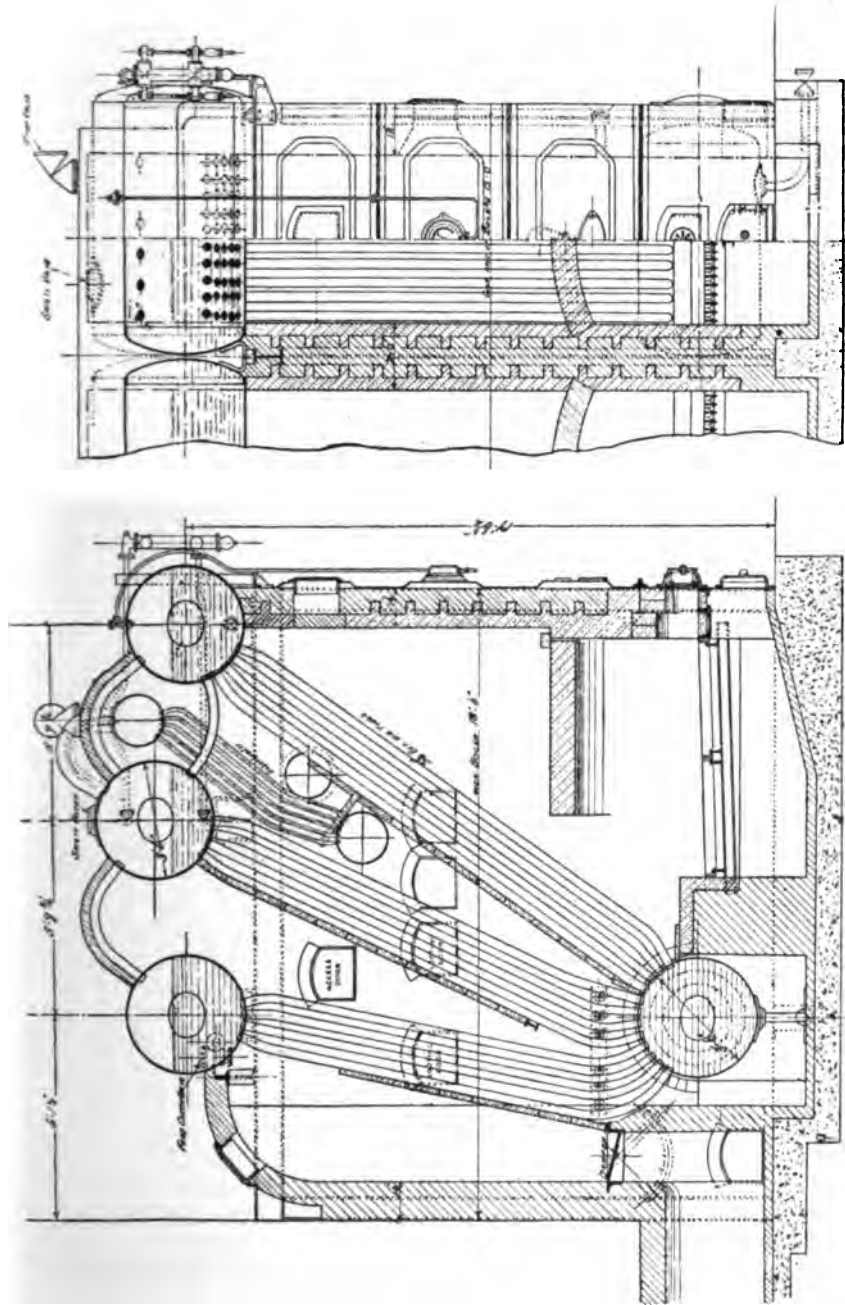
Longitudinal and Transverse Sections, with Part of the Front Exterior, of a Four-drum "Stirling" Boiler with Superheater.
